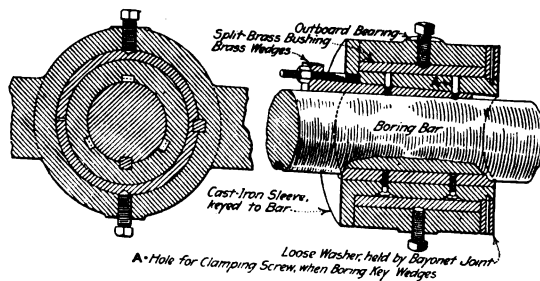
ADJUSTABLE BORING-BAR BUSHING
